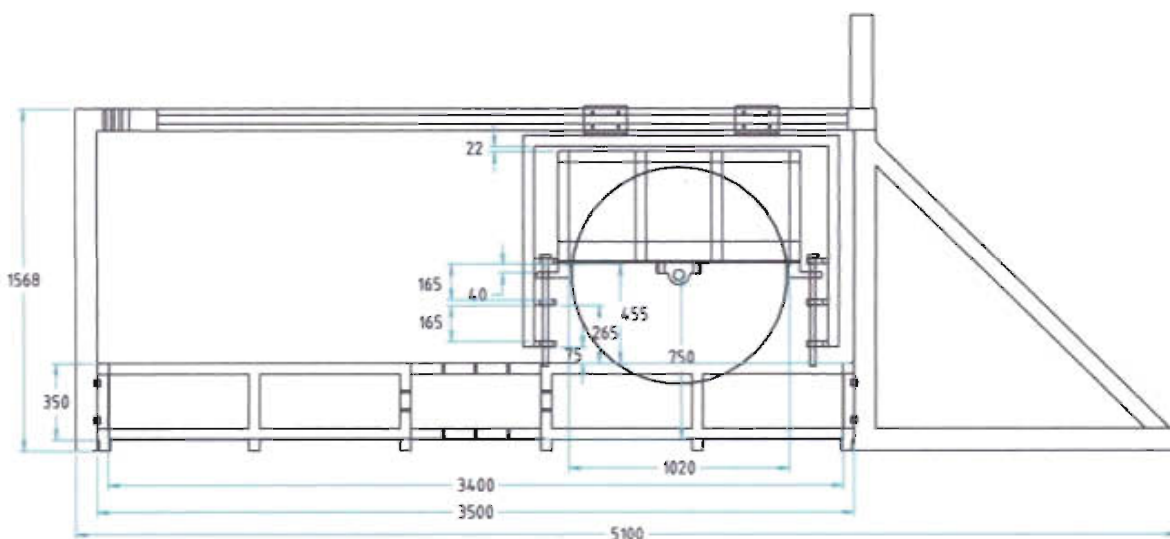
Cricket rolling simulator design. All dimensions are mm.
